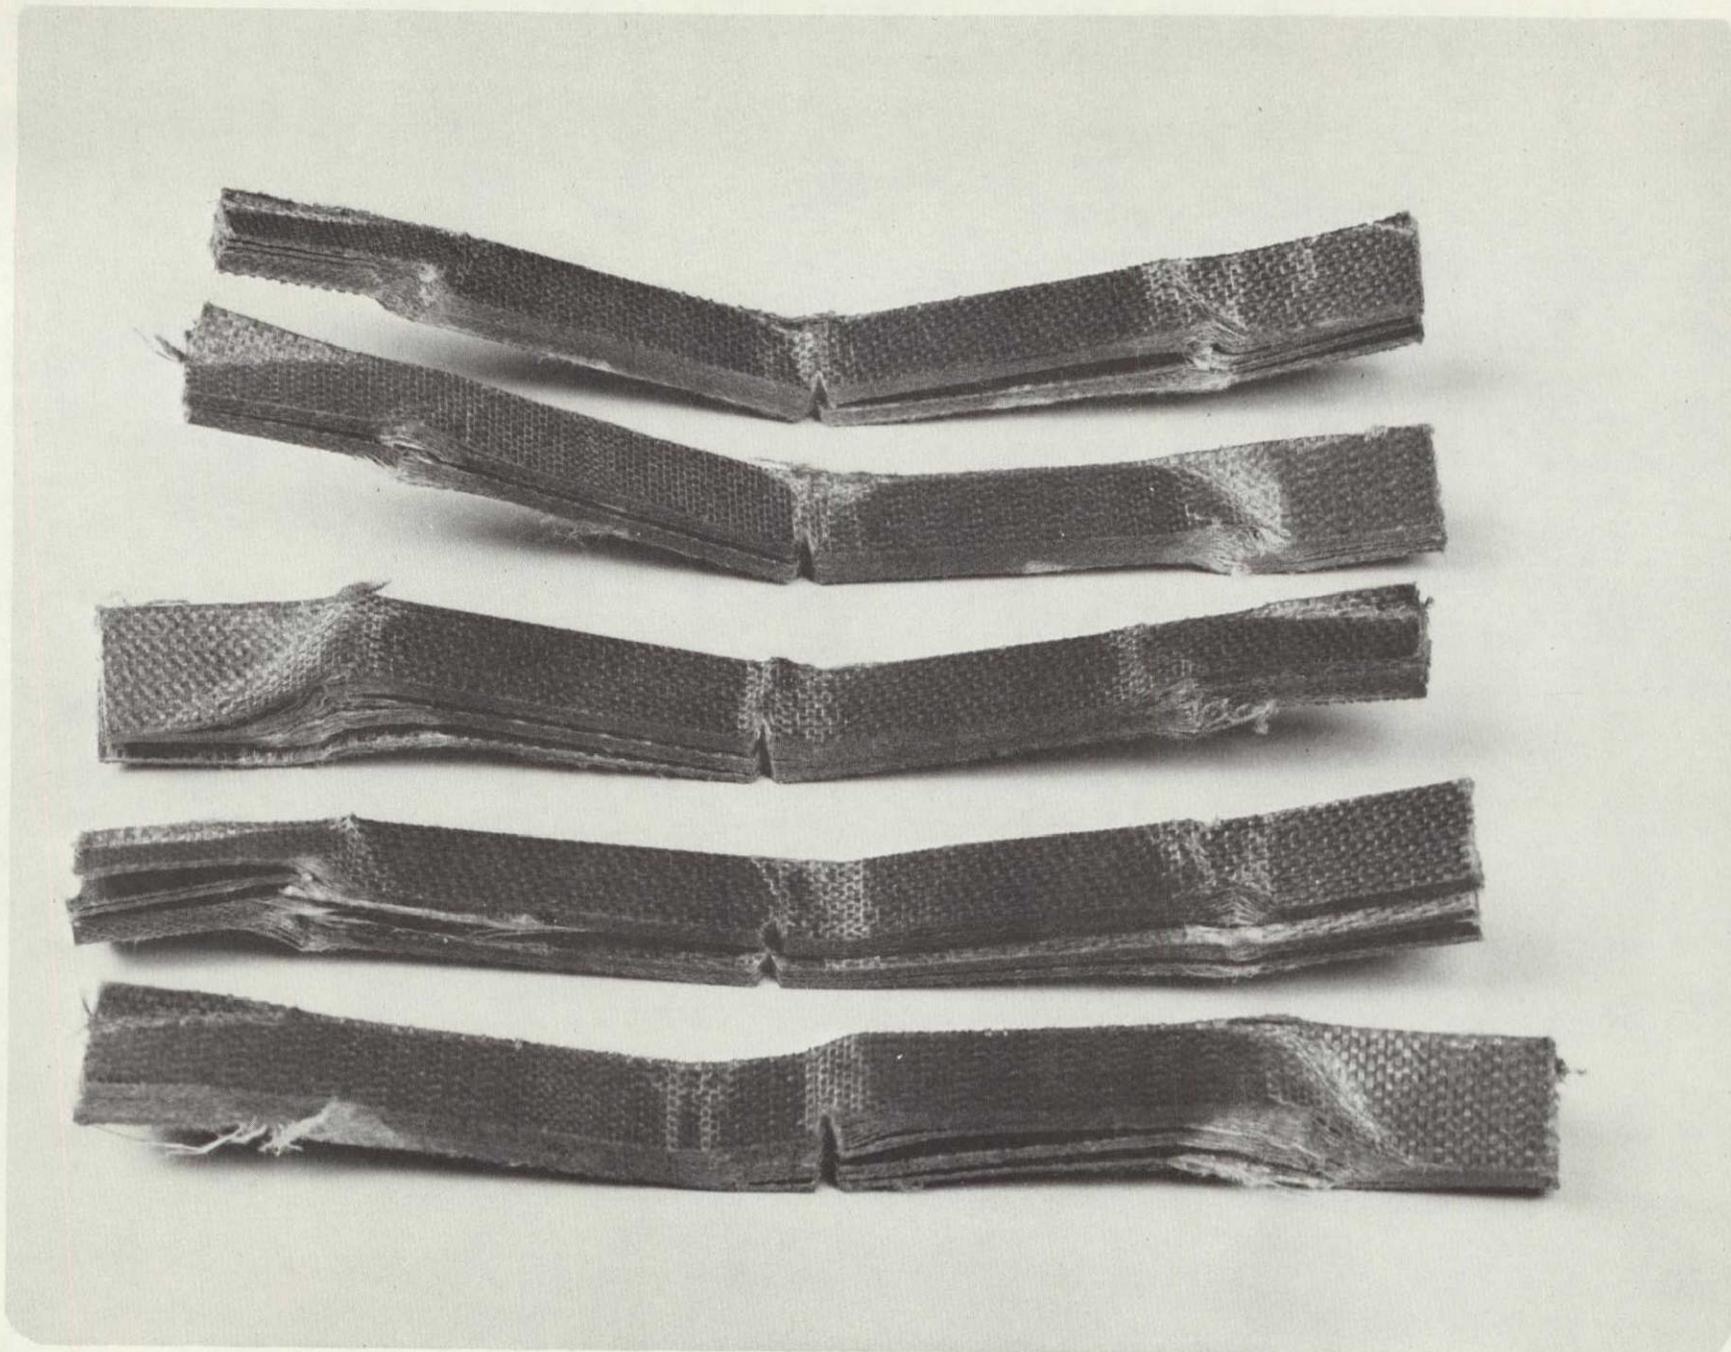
Failed Skybond 703/Kevlar 49 Impact Specimens
